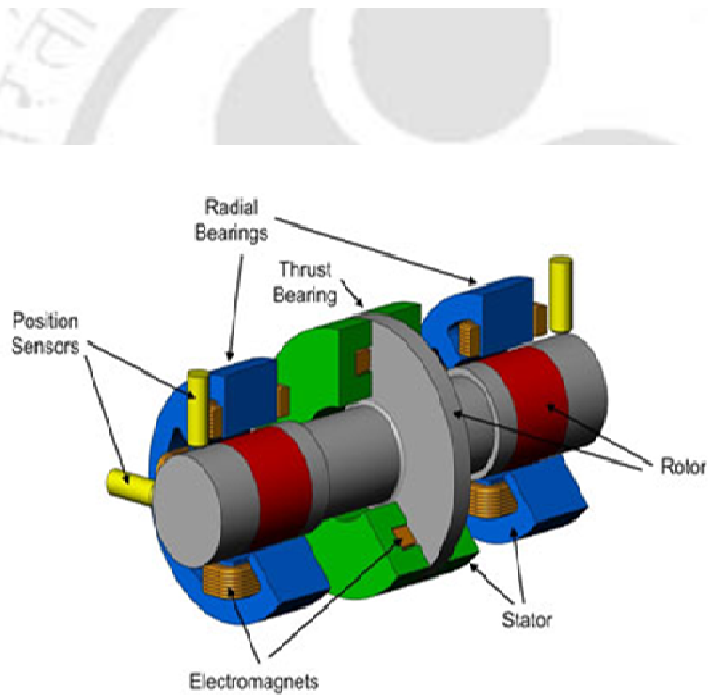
A 3D solid model of a rotor system with two radial magnetic bearings and one double acting magnetic thrust bearing (Courtesy: Synchrony, Inc.)
